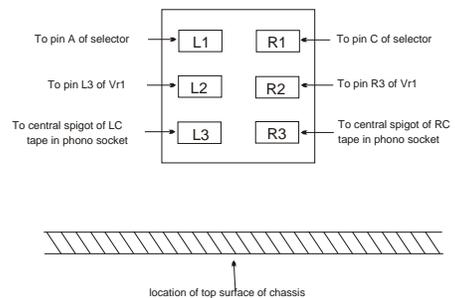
EXPLODED VIEW OF HOW TO FIT THE PHONO SOCKETS
